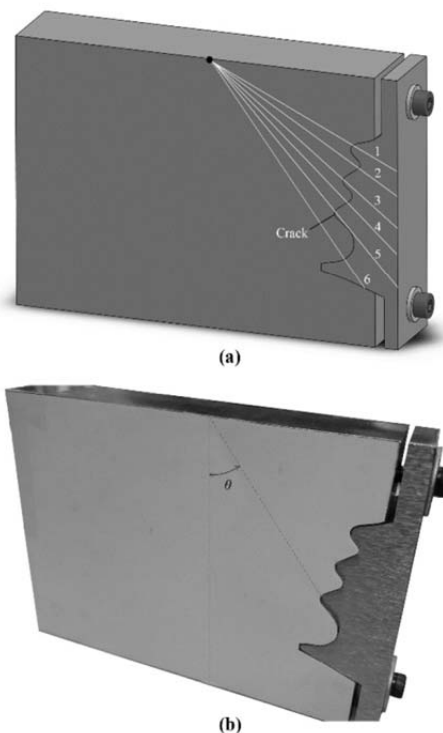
(a) Model of test specimen in 3D modeling software, (b) Built test specimen
